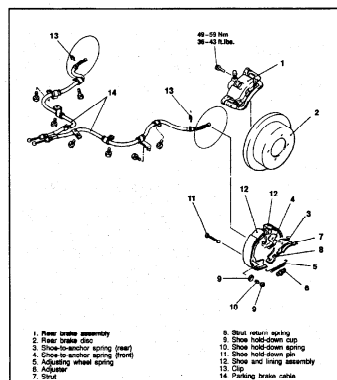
Exploded view of the parking shoes and related components—1994–00 Galant with disc brakes
